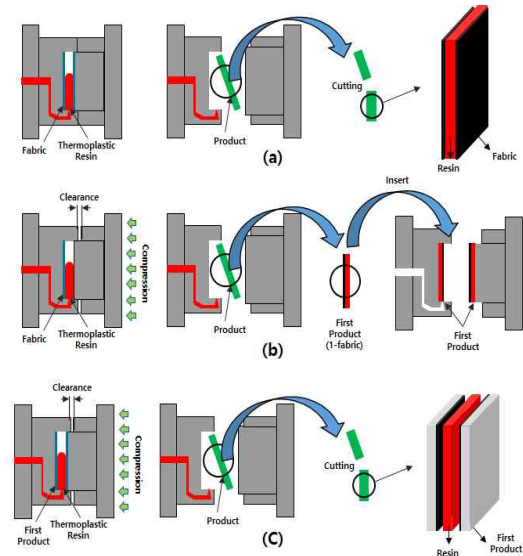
Schematic of injection molding process : (a) Injection molding(IM), (b) Injection compression molding(ICM), (c) : Insert-over molding(IOM)
